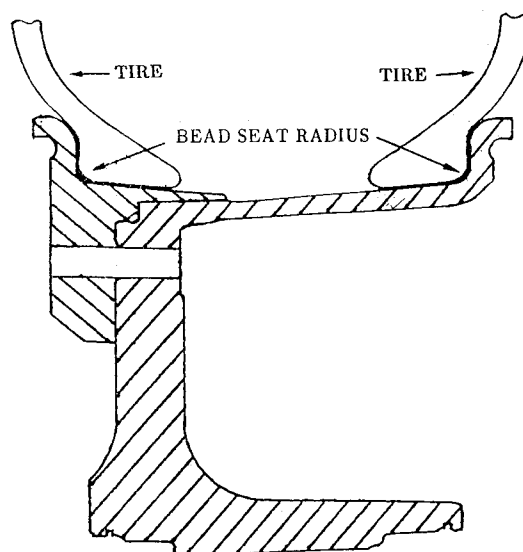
Cross section of F-16 wheel and tire assembly showing the tire-wheel interface.
